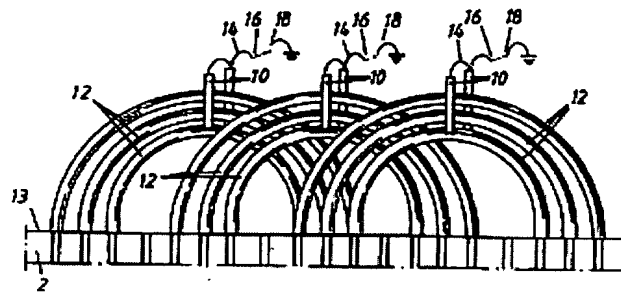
Detail of End-Winding Region of Machine Having ABB's Flexible Cable Windings
